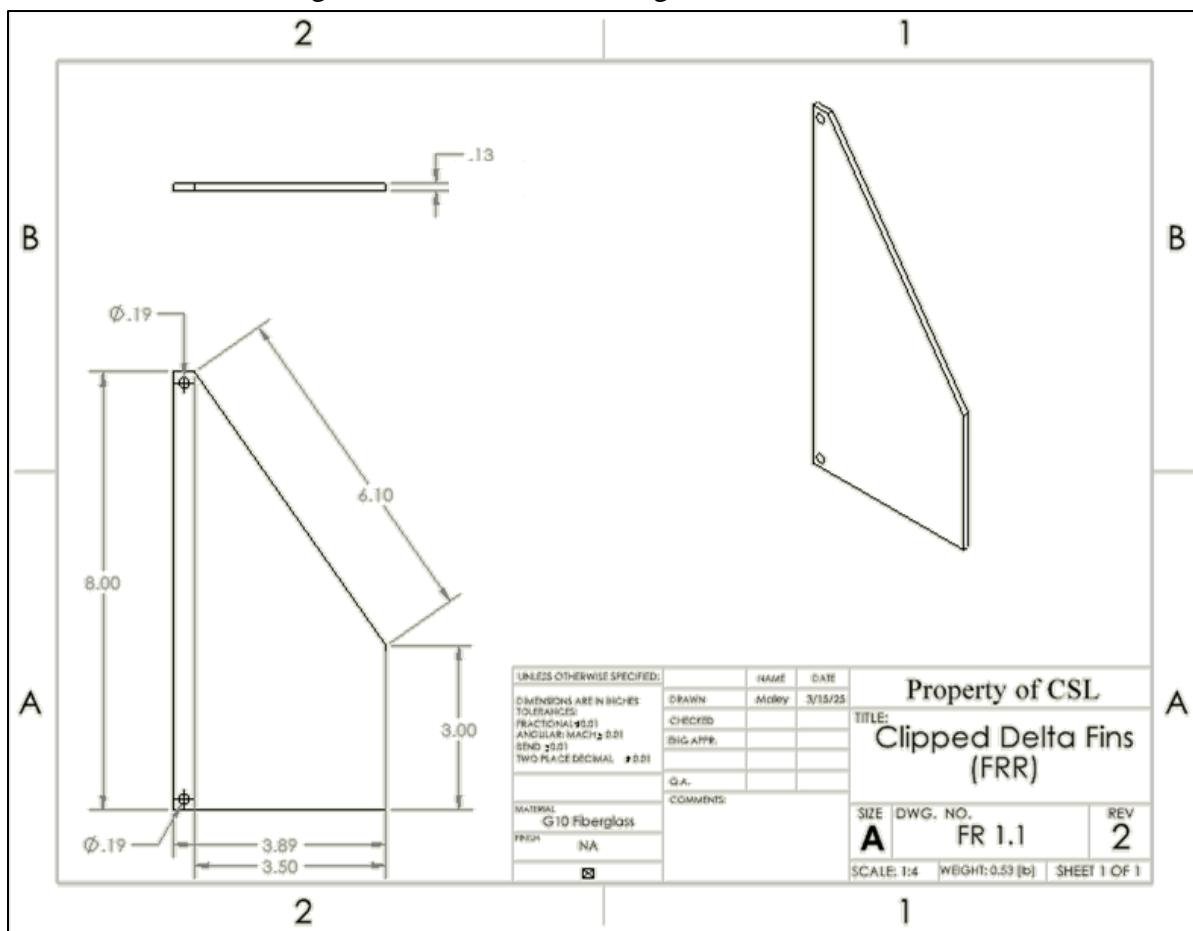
SolidWorks fin drawing with important dimensions.
